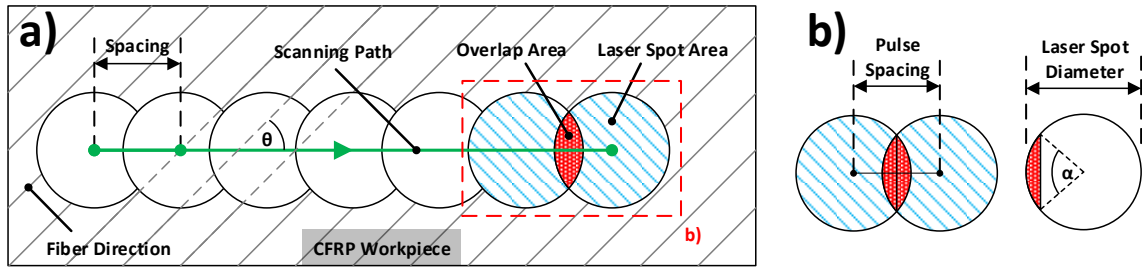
(a) Schematic of laser scan path over CFRP workpiece during nanosecond laser machining experiments; scan path direction, θ , is not relevant for woven CFRP samples. (b) Pulse Spacing and Laser Spot Diameter are used to calculate the Overlap Angle, α , and the Overlap Ratio, OR .
